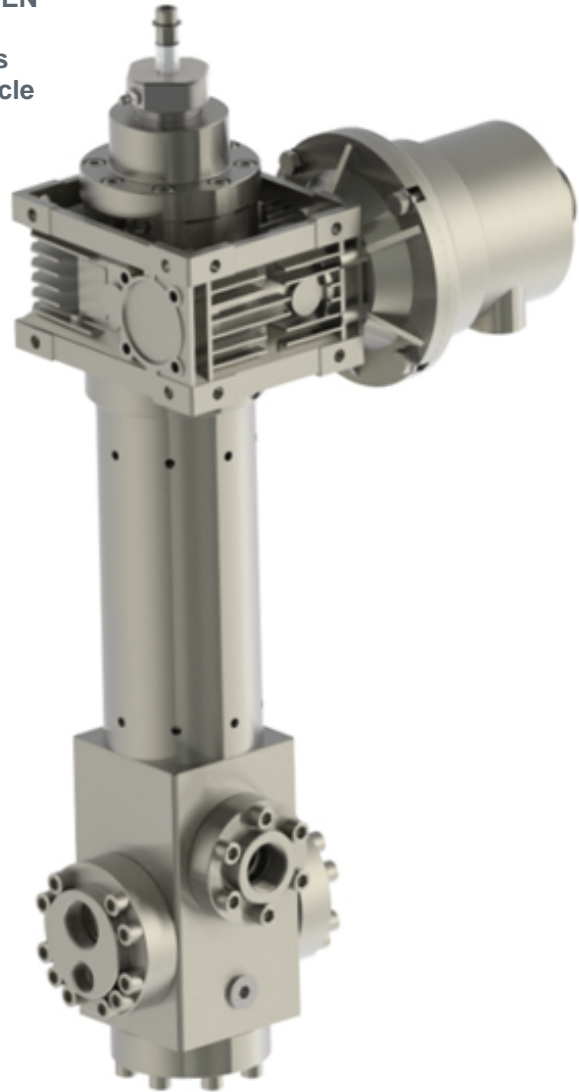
PN 29137: GEN 2 Pressure Regulator, Air Motor
